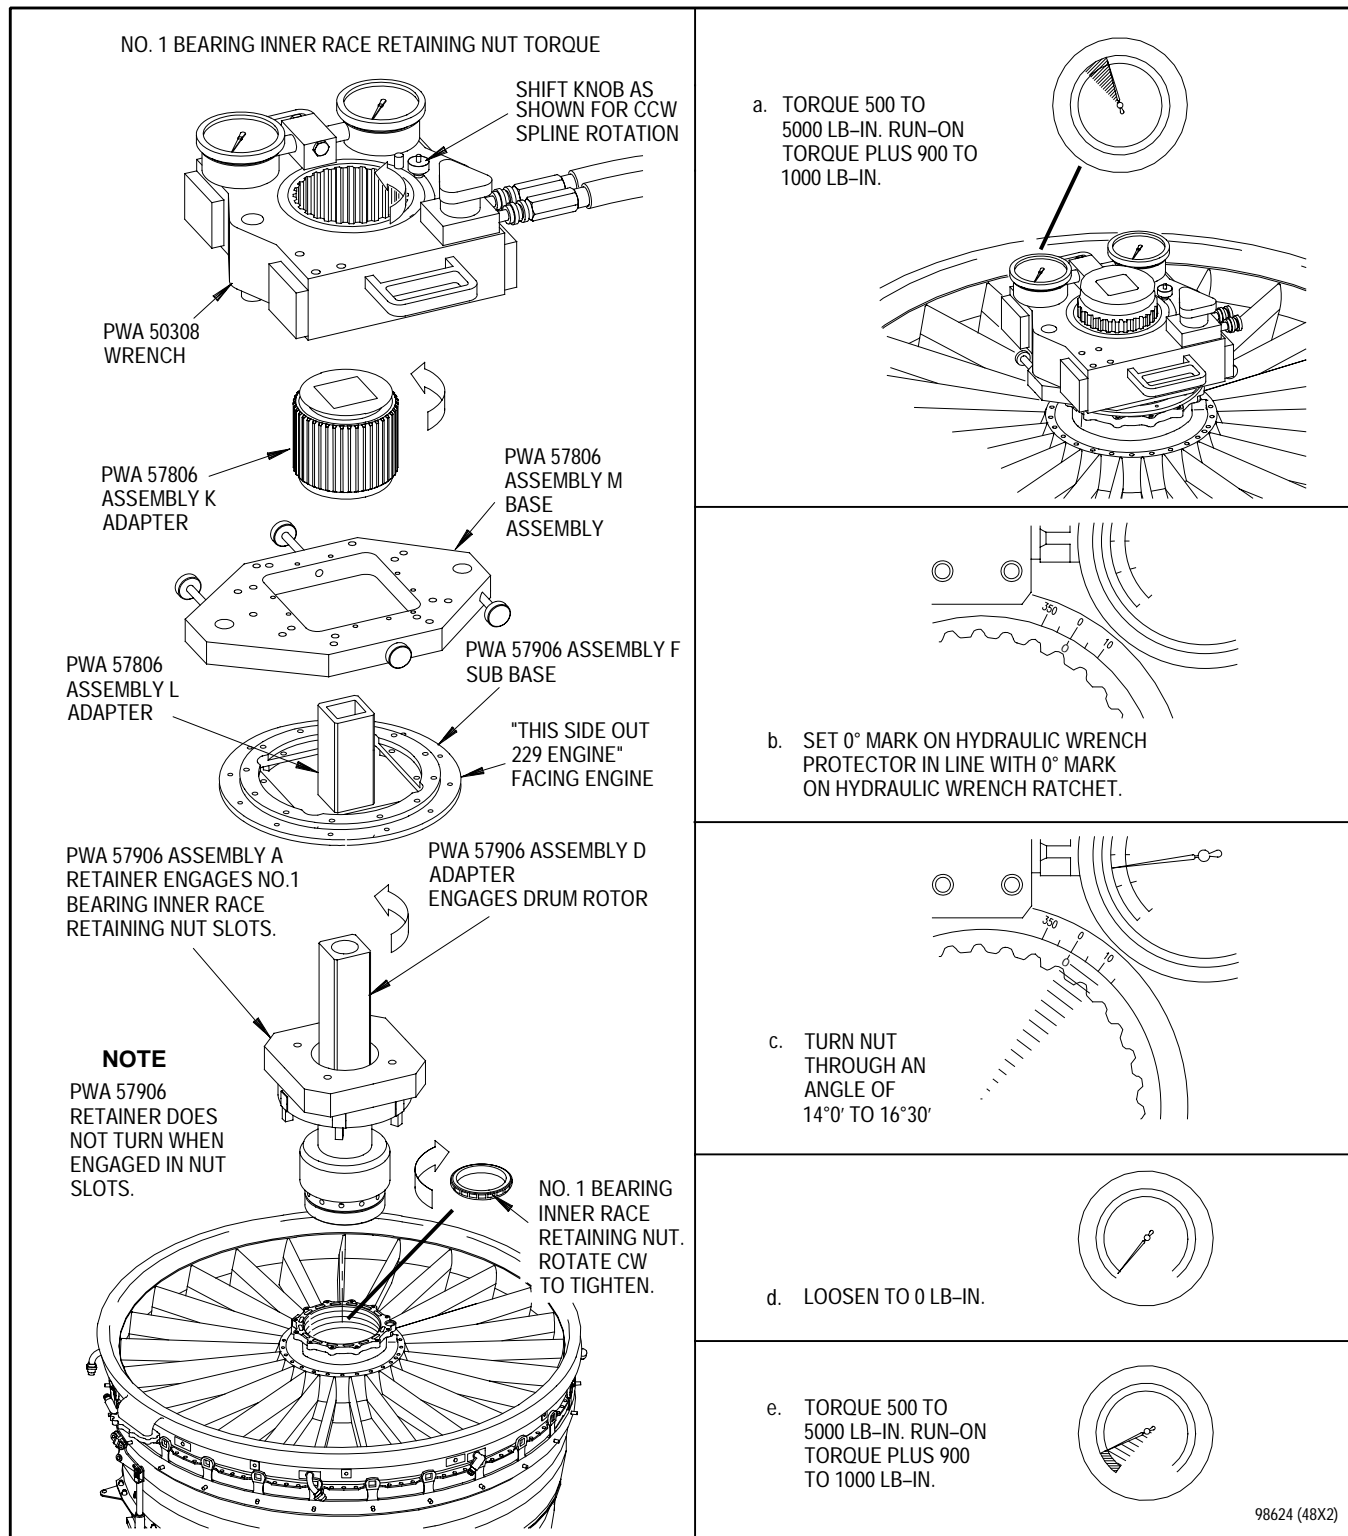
No. 1 Bearing Inner Race Retaining Nut - Torque (Sheet 1 of 2)
